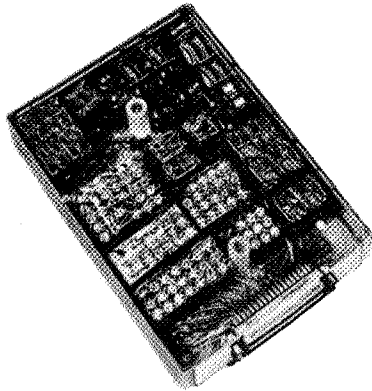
Printed circuit card, mounting unencapsulated welded "cordwood" modules.
